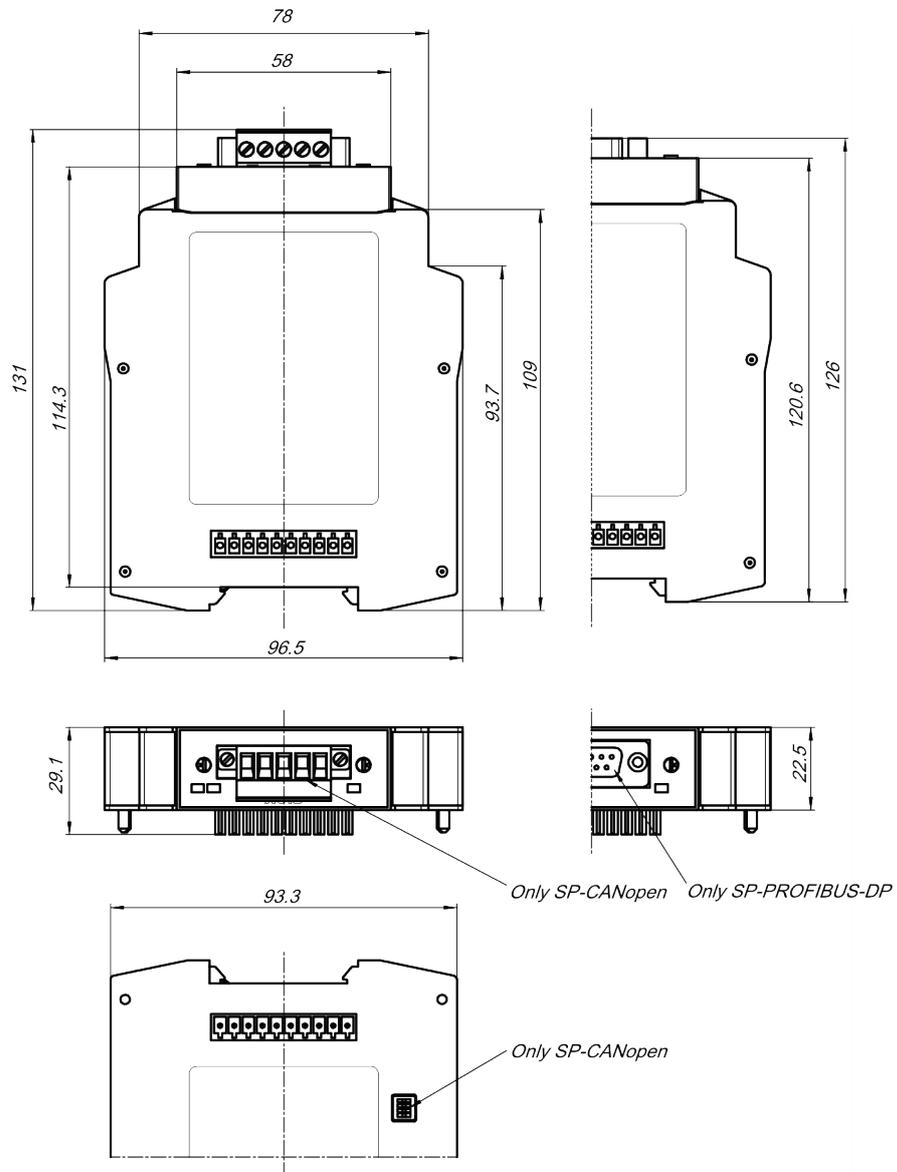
Dimensional drawing SP-CANopen and SP-PROFIBUS-DP (mm)
